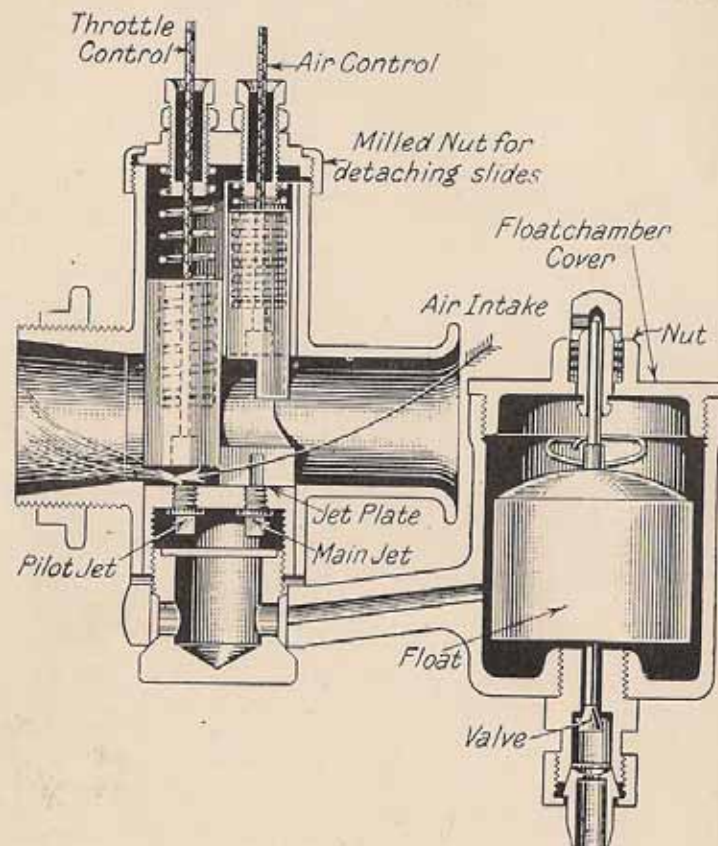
SECTIONAL VIEW OF BINKS CARBURETTOR
